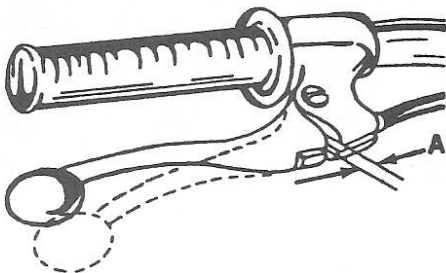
Brake lever free play (A) should be 4-5 mm (0.16-0.20 in.).
